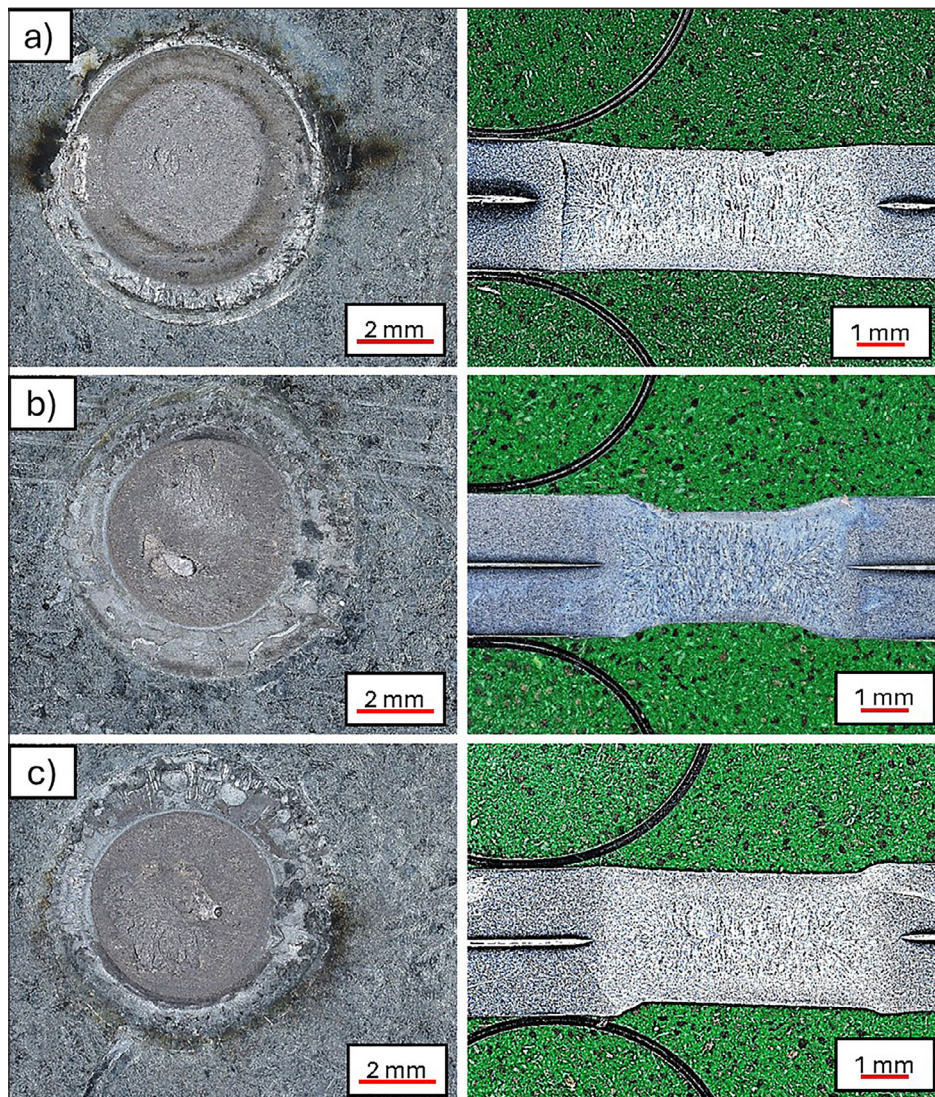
Images of the weld surface and its cross-section (weld nugget) after previously performing with the electrode (a) 300, (b) 500, and (c) 1100 welds
